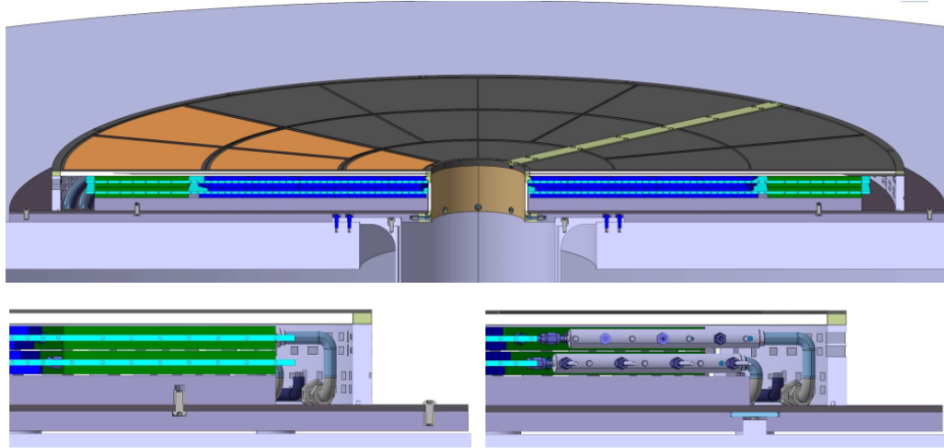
3D cut view of the two instrumented layers inside the closed hermetic vessel. The main assembly parts are shown in their operating run configuration. The 2D sections on the bottom right and left are detailing the cooling manifolds area and the peripheral electronics boards respectively.
